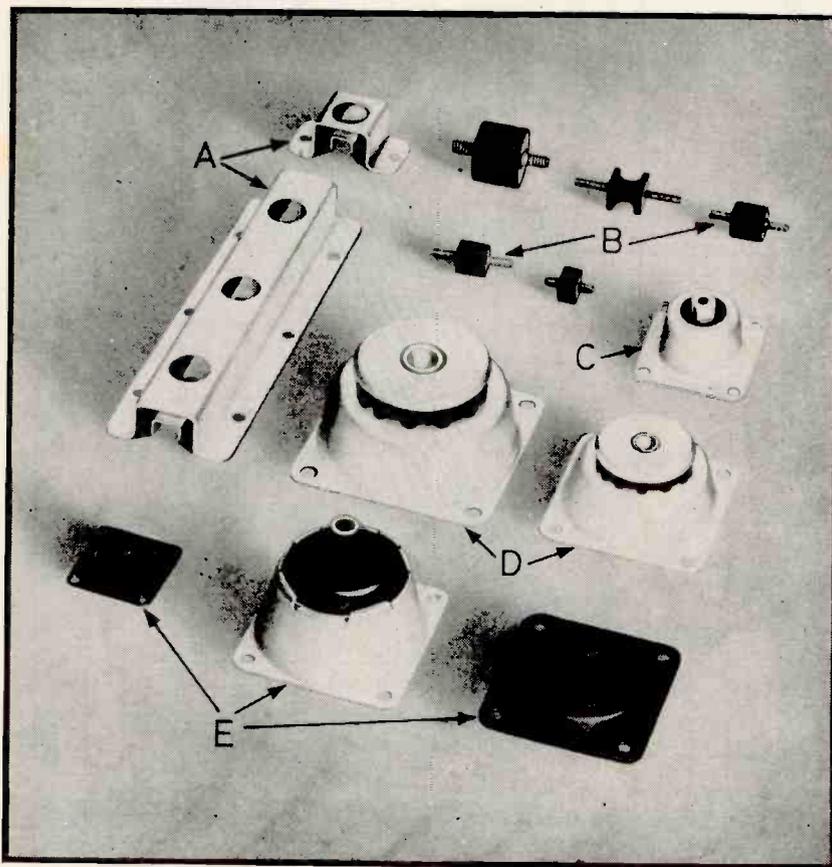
Several types of rubber mountings made by U. S. Rubber Co. Type (A) are channel-shear mountings; (B) cylindrical compression or shear; (C) safety-type cylindrical; (D) flexure-compression cups; and (E) flexure
